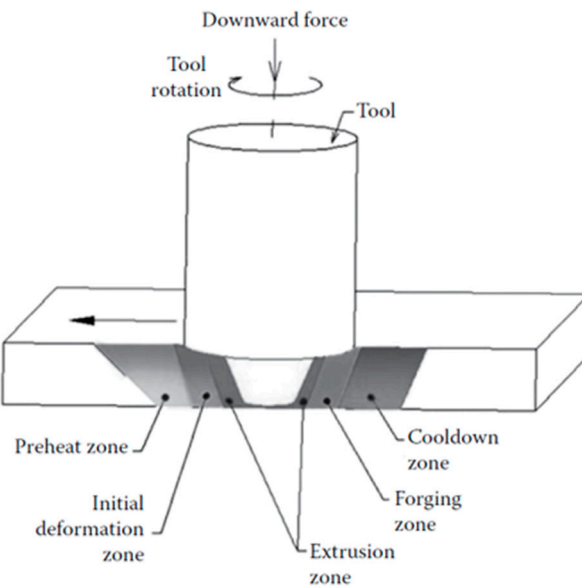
Stages in the Friction Stir Welding (FSW) process [7].
